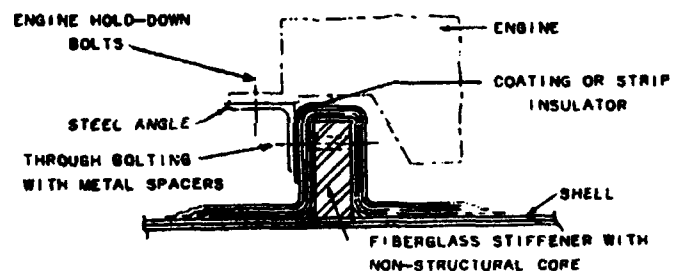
Engine Bearer - Steel Angle Bolted to Hat Stiffener [Gibbs and Cox, *Marine Design Manual for FRP*]
